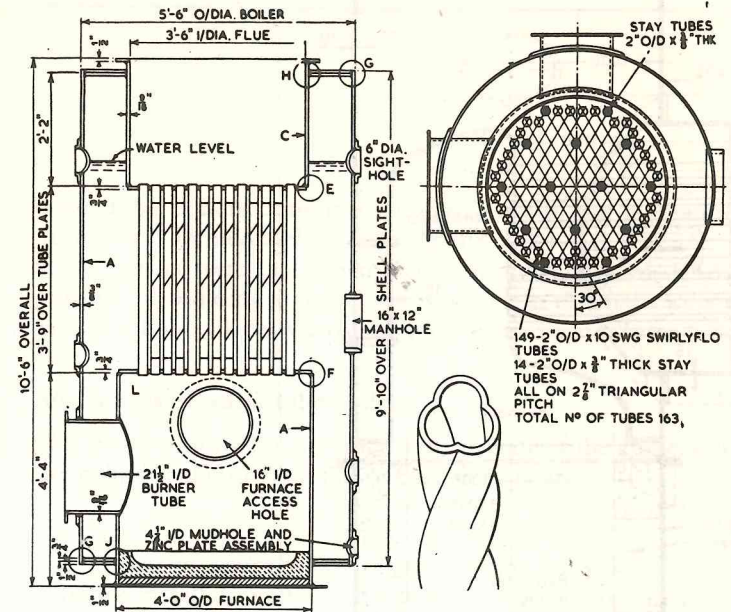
Constructional details of a Spanner oil-fired donkey boiler
